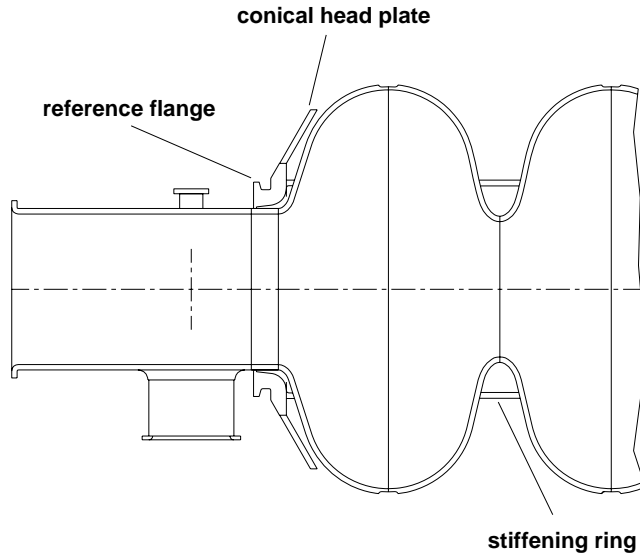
End section of a cavity with stiffening ring, conical head plate for welding into the helium tank and reference flange for alignment.
